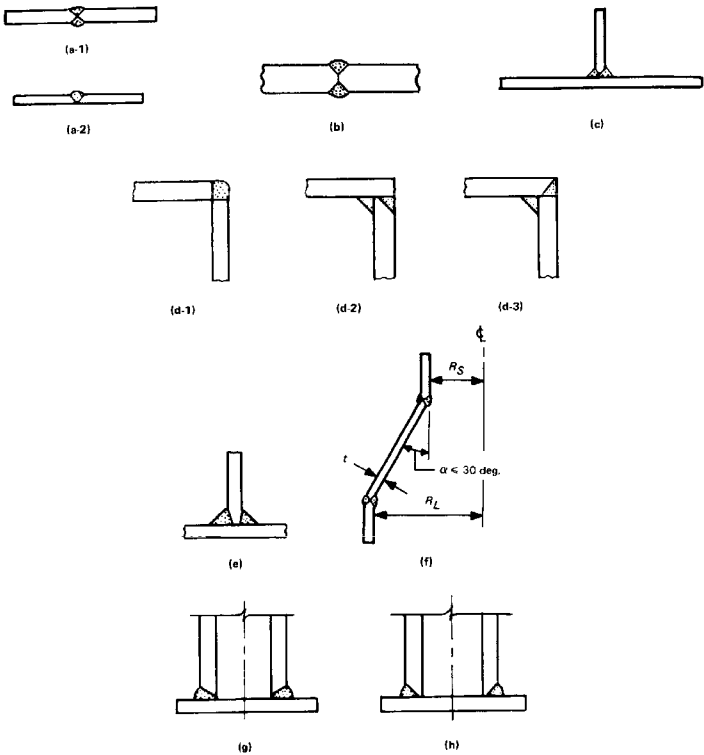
PERMISSIBLE WELDED JOINTS FOR CLASS 1 PLATE- AND SHELL-TYPE SUPPORTS
